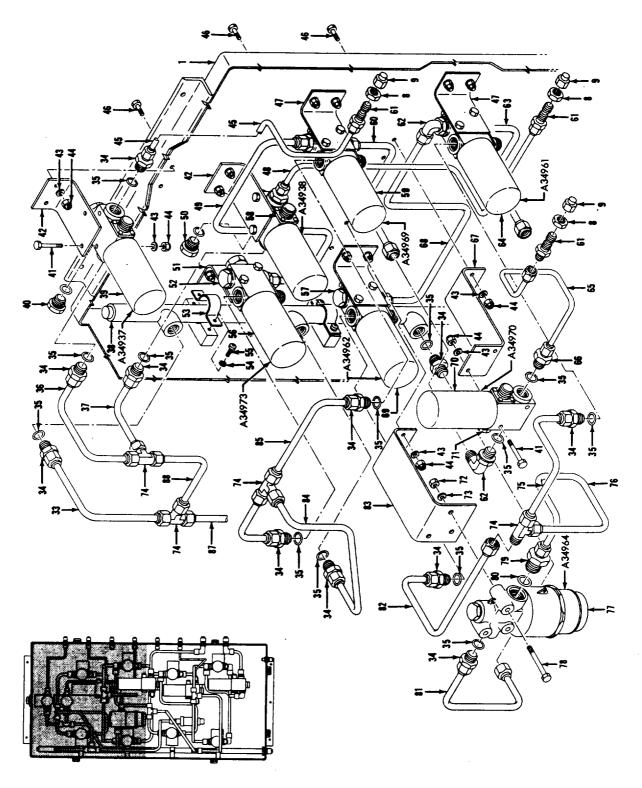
Pneumatic Box Assembly (Sheet 2 of 7)
